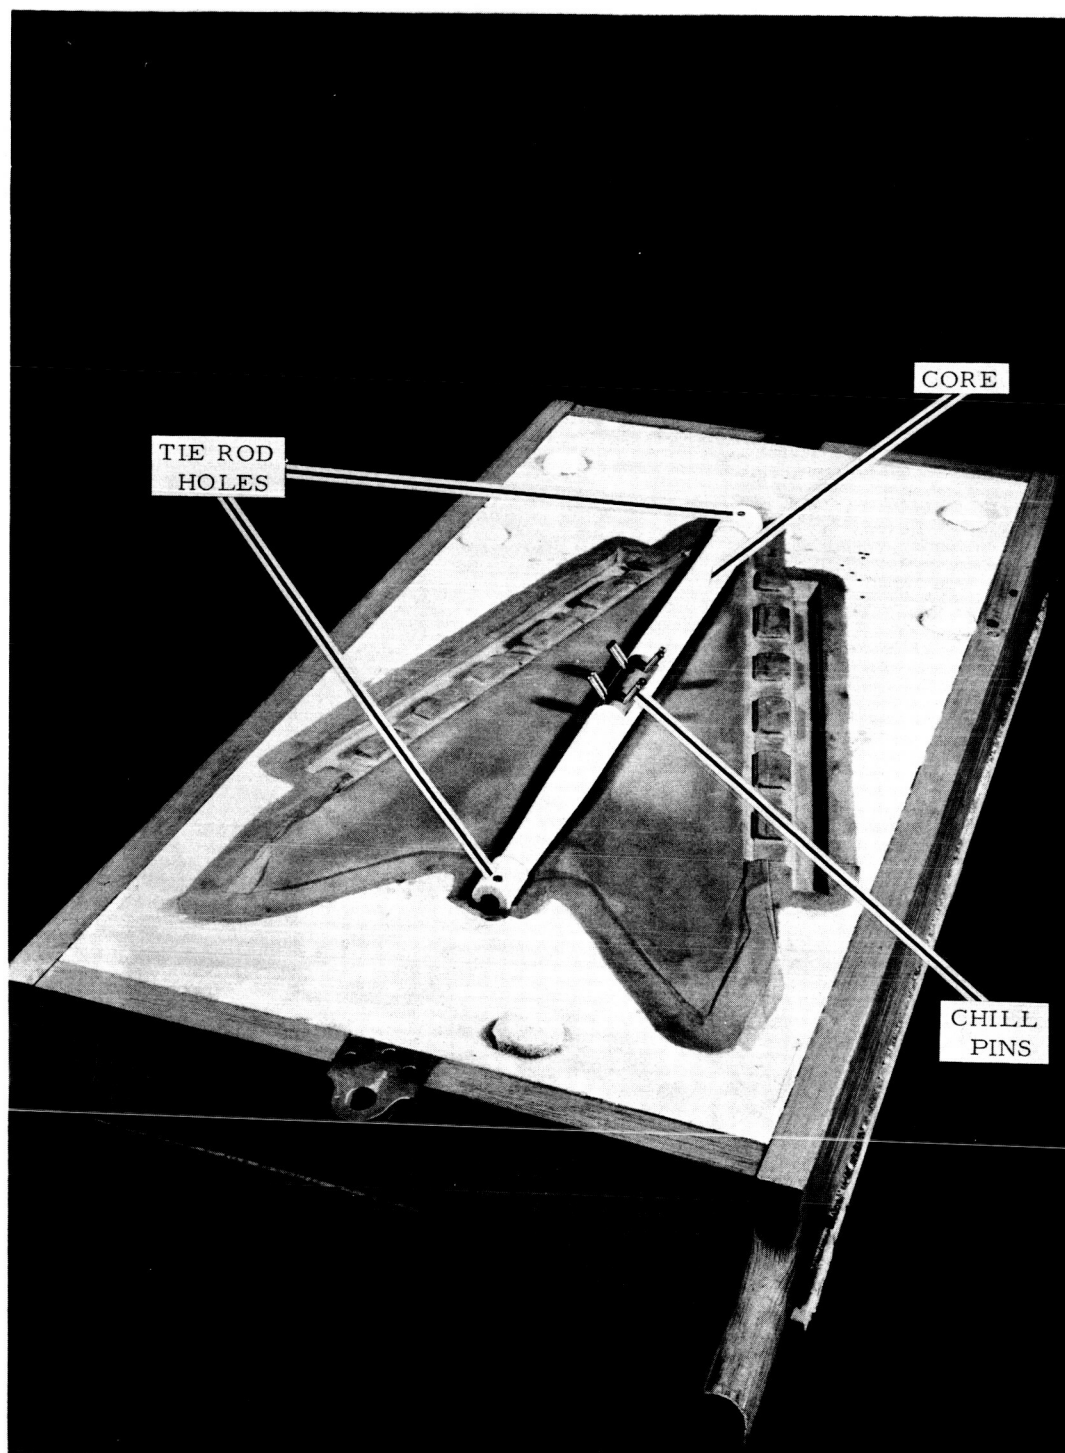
Drag Half of Mold, Showing Core with Balance Seat Mounting-Bolt Hole Chill Pins in Place
